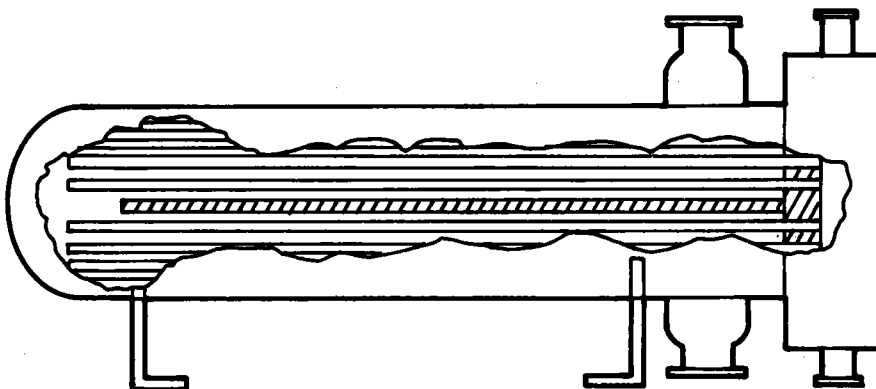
Typical Two-Shell Pass, U-Tube Heat exchanger With Tube Bends in Horizontal Plane, Permanently Attached Longitudinal Baffle, and Removable Tube Bundle
